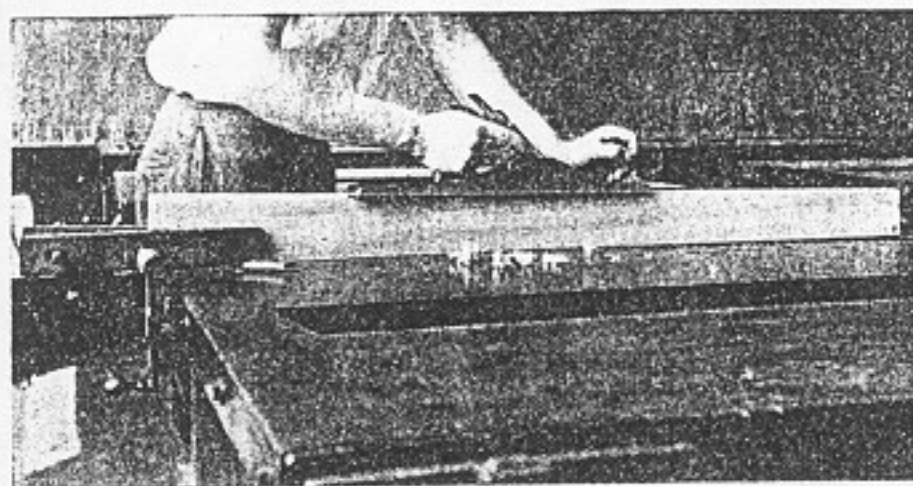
Planing edge of a long board, one end held in vise, the other supported by a hand screw.
